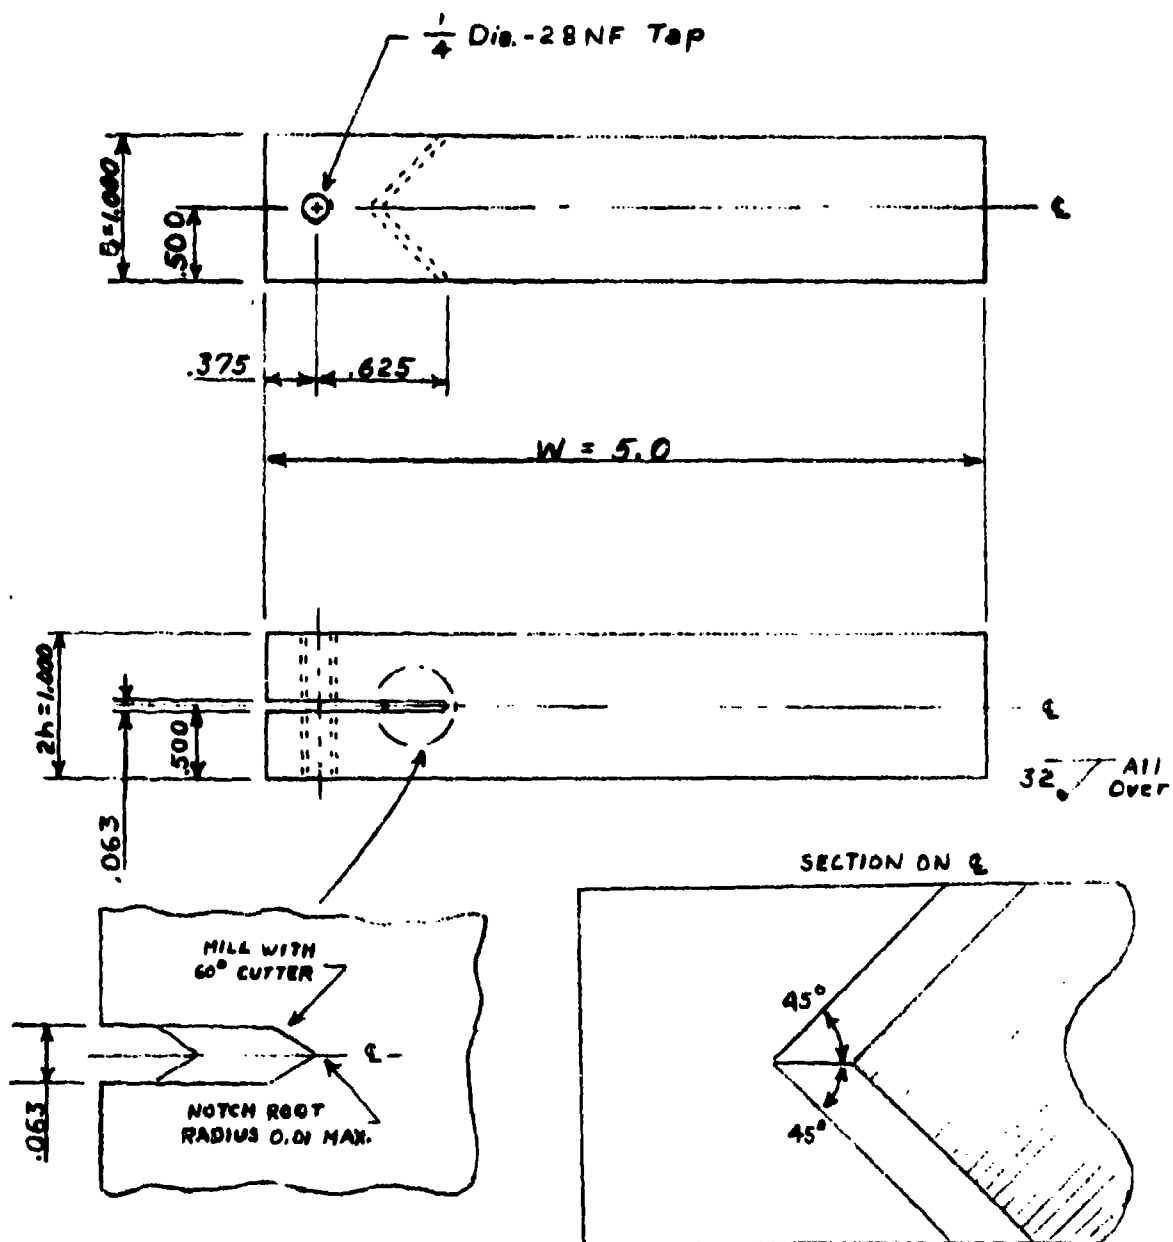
Configuration of Double Cantilever Beam (DCB) Specimen Used for SCC Tests
